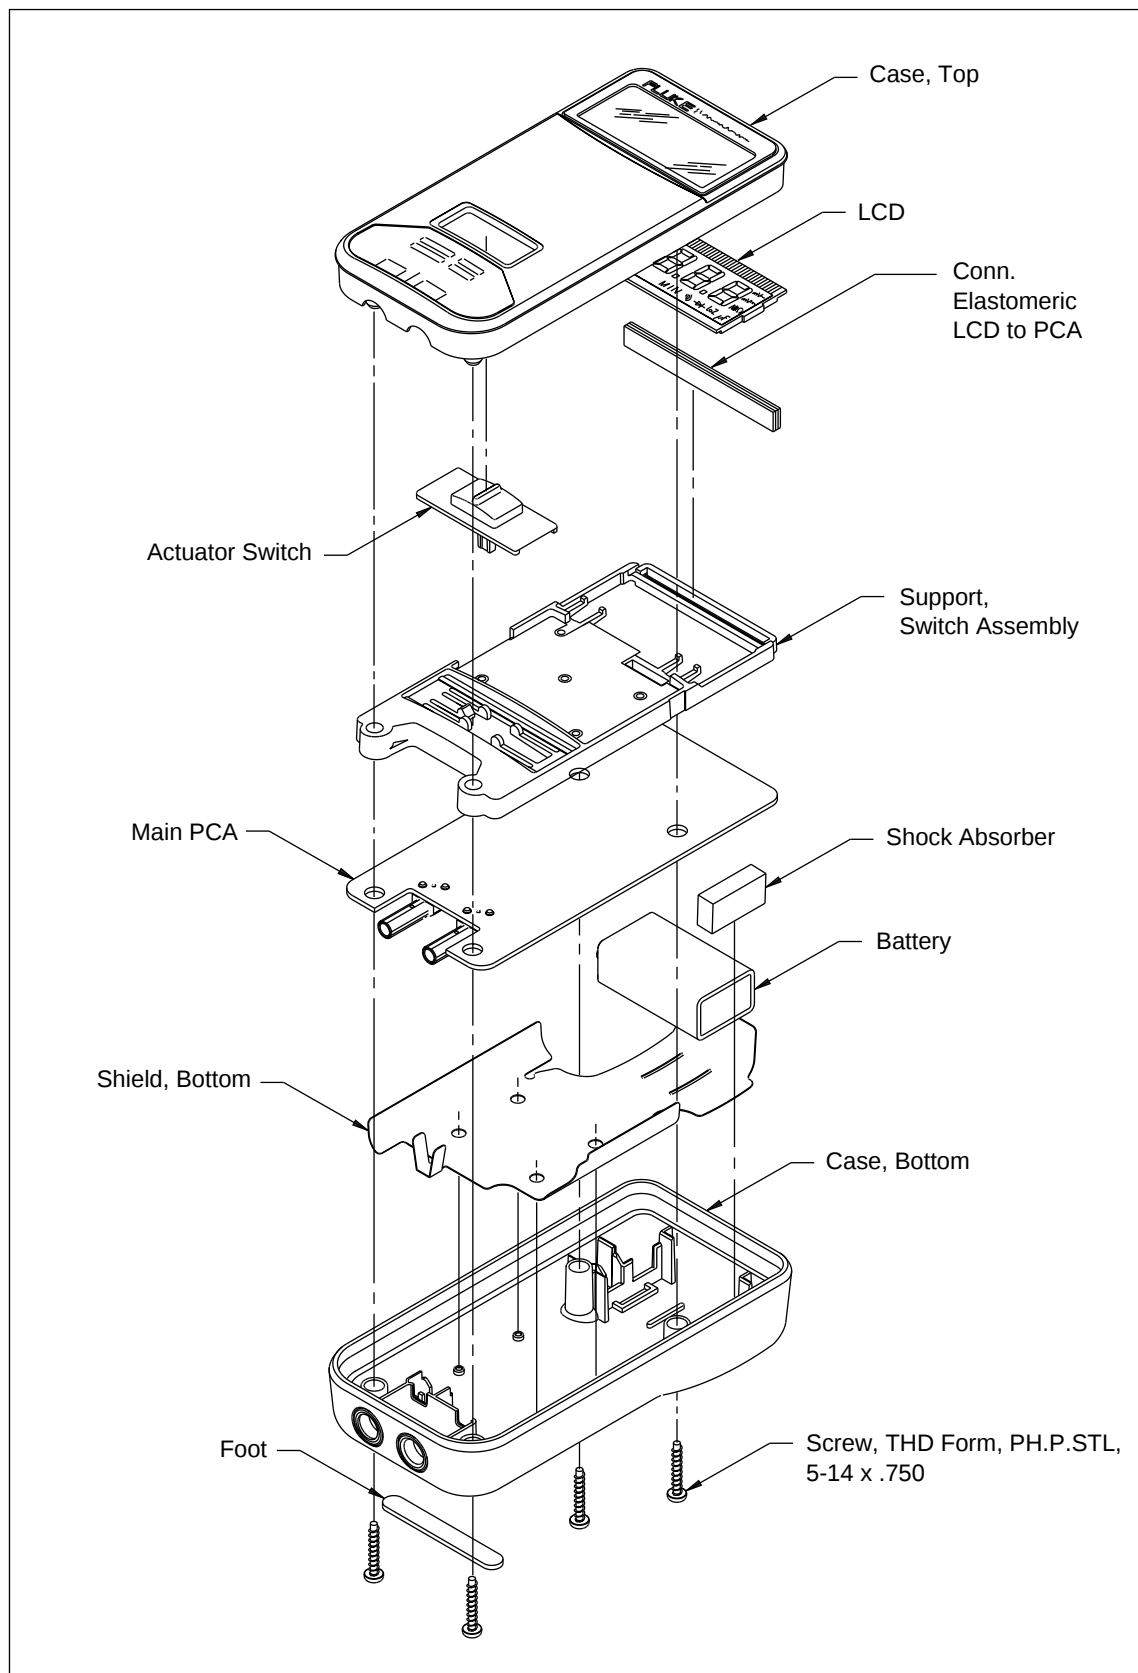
Models 7-300 and 7-600 Disassembled Unit
